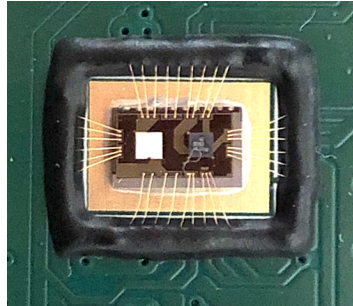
LED driver IC wire-bonded to the PCB following FC bonding process.
